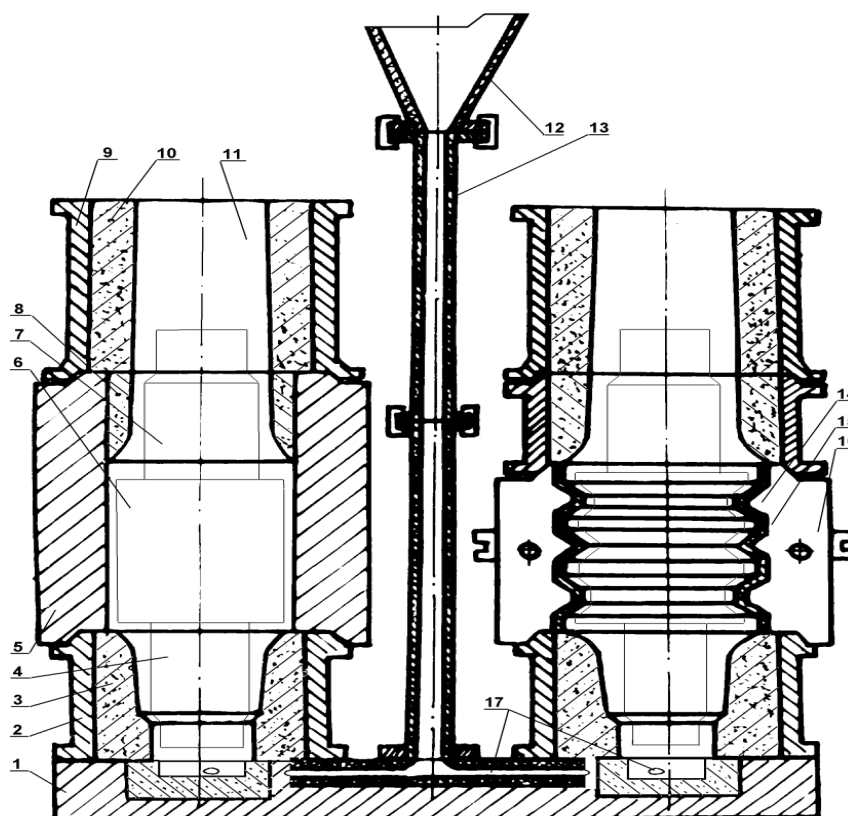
Mold for roll casting with a smooth body and cast roll pass design (fine lines mark the finished size of rolls): 1 - two-place tray; 2 - shape of lower neck; 3 - foundry molding sand; 4 - lower roll neck; 5 - chill mold; 6 - roll body; 7 - upper roll neck; 8 - foundry molding sand in the metal mold; 9 - deadhead shape; 10 - deadhead sand; 11 - deadhead; 12 - riser; 13 - downright; 14 - bulge of chill mold groove; 15 - cavity of chill mold groove; 16 - metal mold with cast grooves and vertical connector; 17 - tangential feeder
